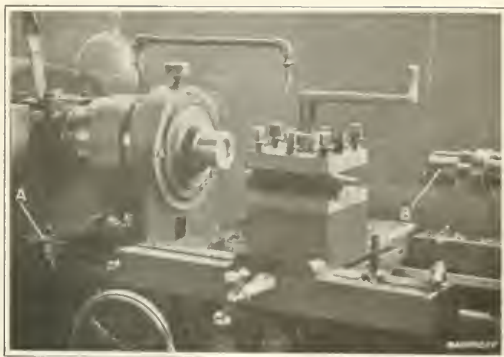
Facing-off Base End and machining Gas Plug Seat
